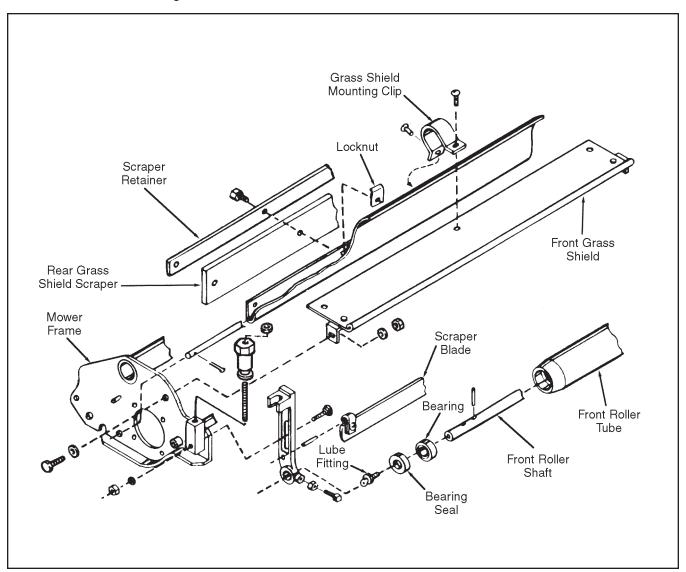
B-3. Disassembly and Reassembly of Front Roller, Grass Shields and Scrapers
